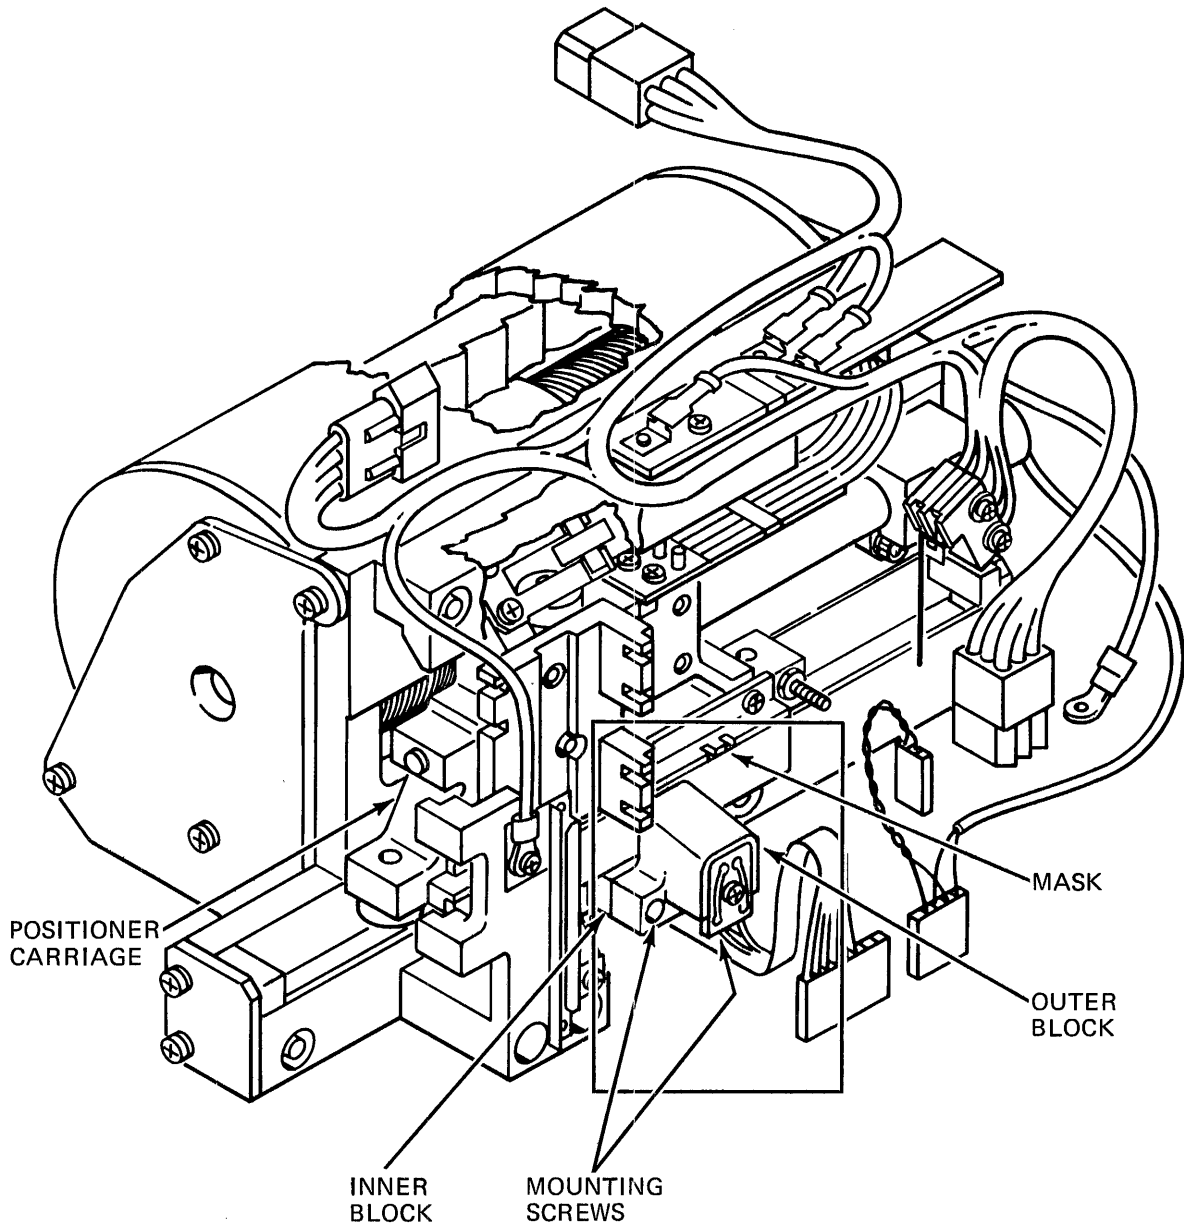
Optical Detent Assembly – Phasing Adjustment
